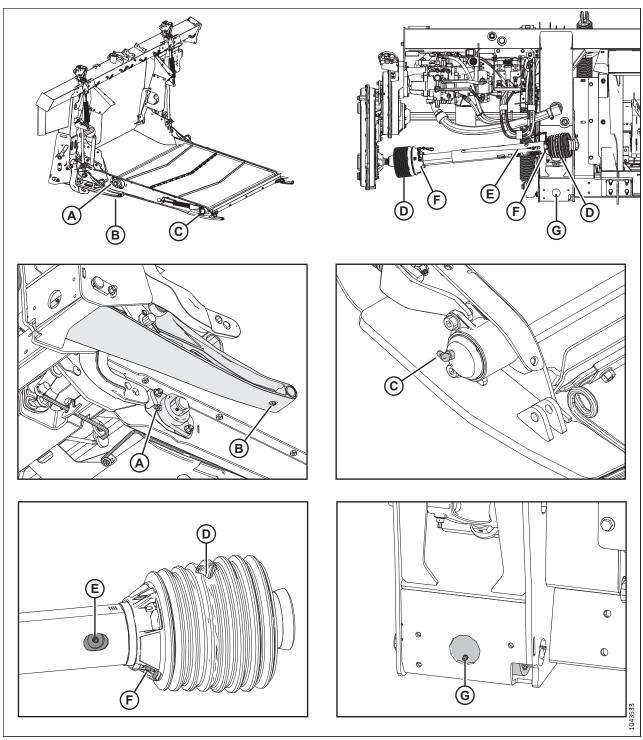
Float Module Grease Zerks – Feed Draper and Gearbox
